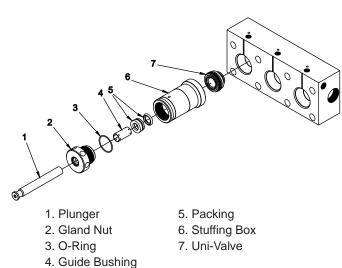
15K/20K Fluid End (Not All Components Shown)
